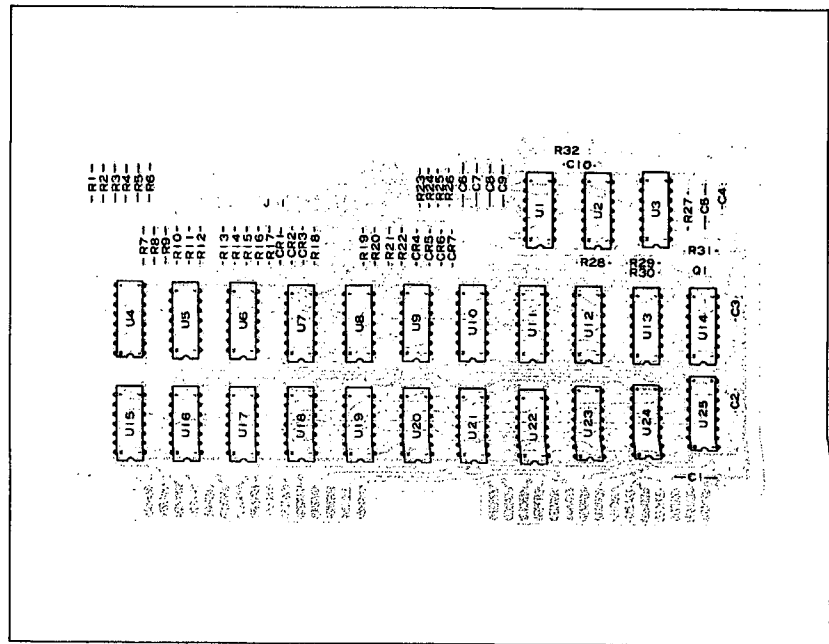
A21 Keyboard Control Board Assembly Component Locations.
